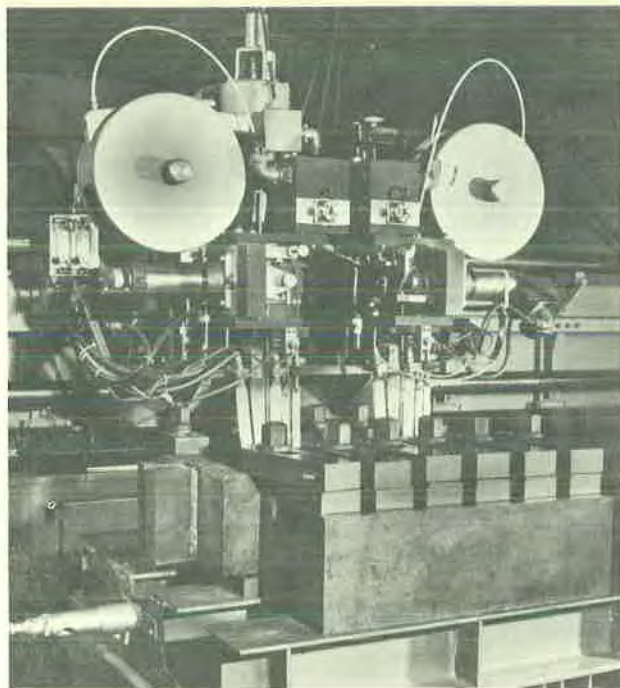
Narrow-Gap welding head arranged for welding of 200 mm thick forged sections of the steel 22 NiMoCr 3 7
